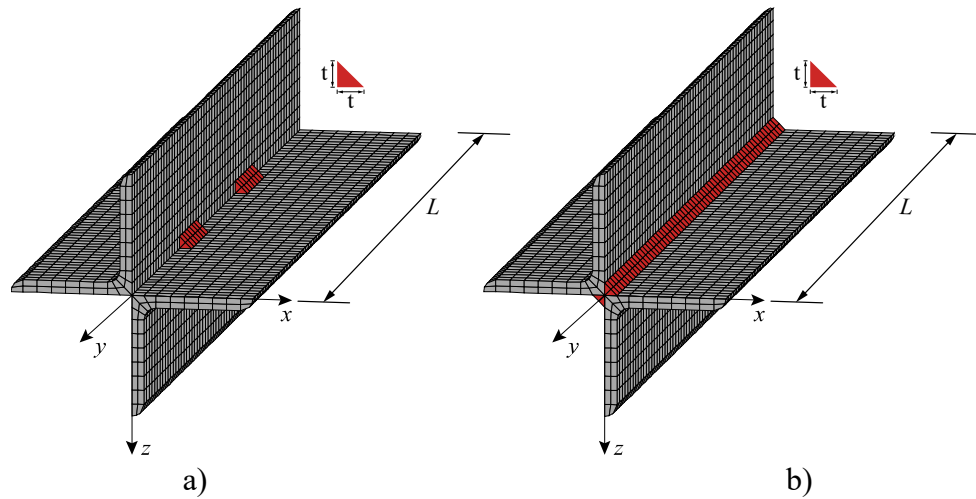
a) Experimental assembly procedure used in Botelho *et al.* [50] and b) finite element model assembly procedure with continuous fillet weld.
